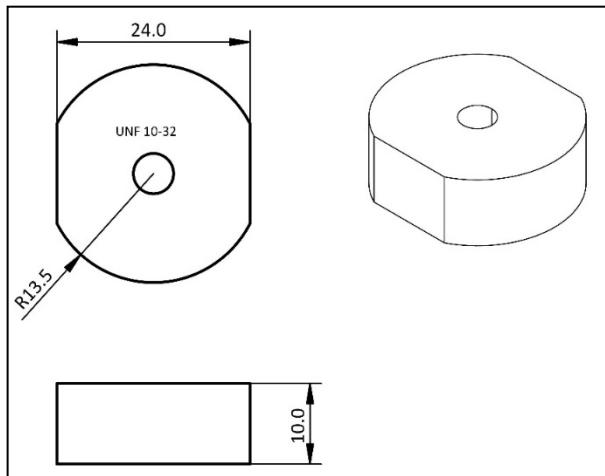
Drawing showing stainless steel adaptor dimensions. Drawing is not to scale.
